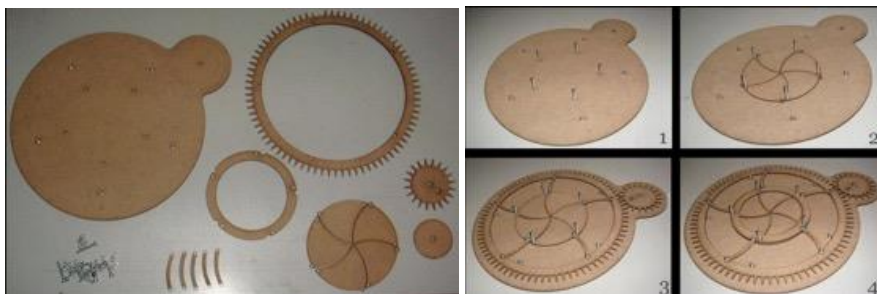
Mechanical Iris* detailed components and assembly (Project B)
